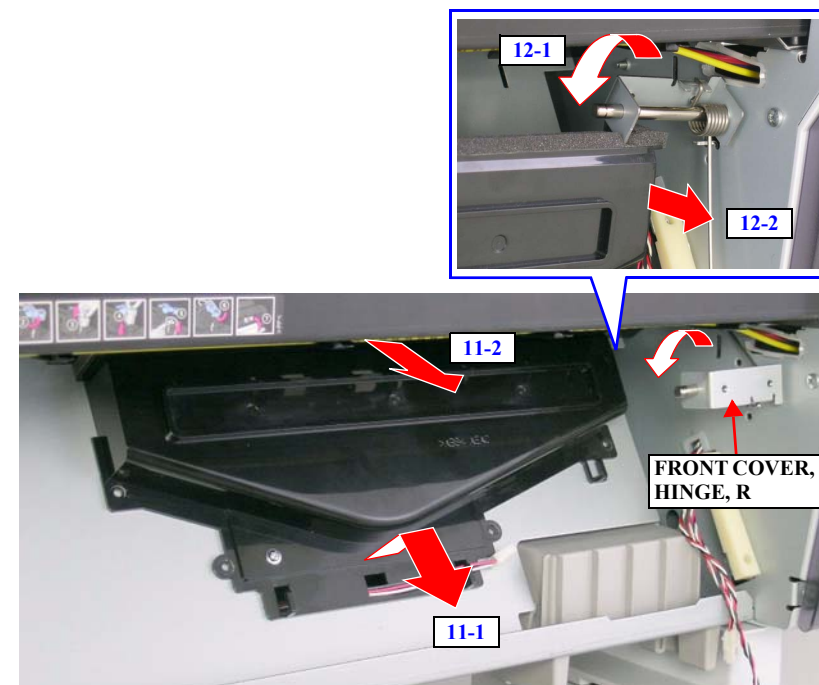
Removing the Right VACUUM FAN ASSY.
